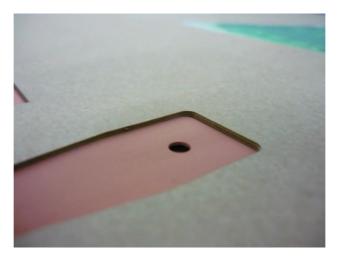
Top view of the mass-lam. Three scored sheets of Kraft paper ensure the perfect rectangular geometry of the guide
